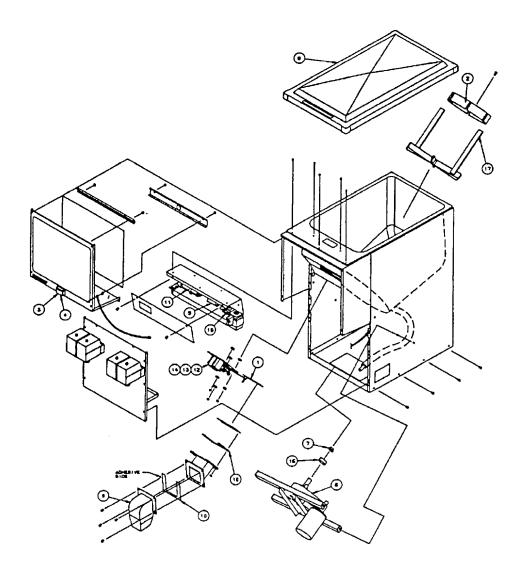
EXPLODED VIEW & PART LIST DB90-BZ (NO SINK)
